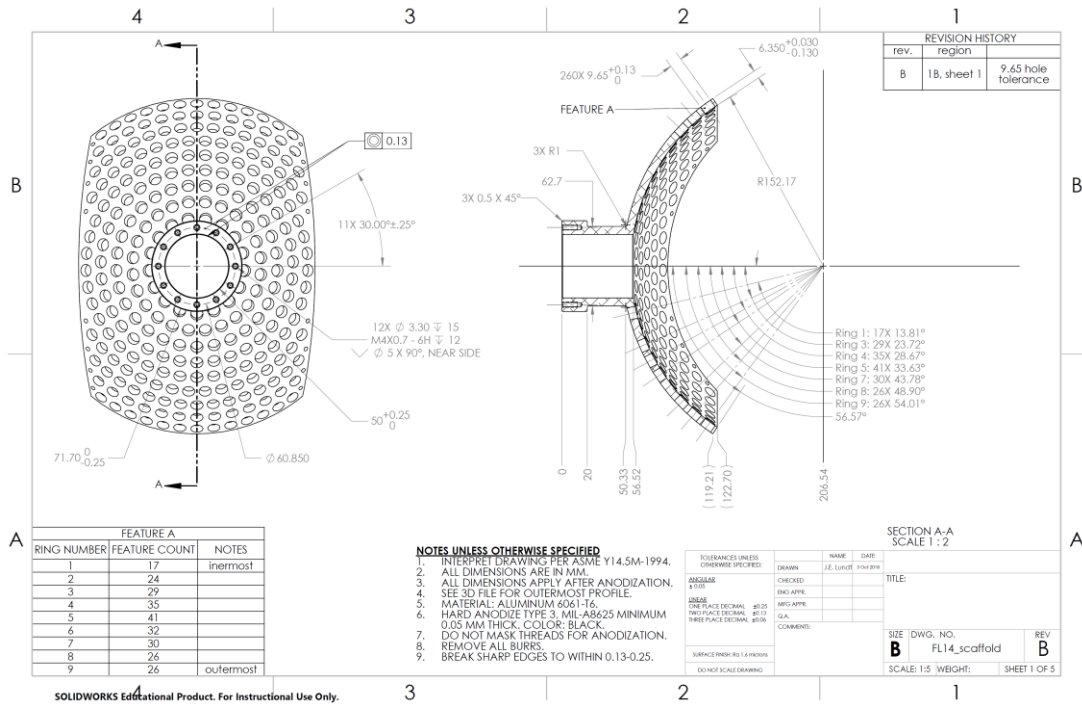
1. Technical drawing of liver array scaffold. Sheet 1 of 5.
